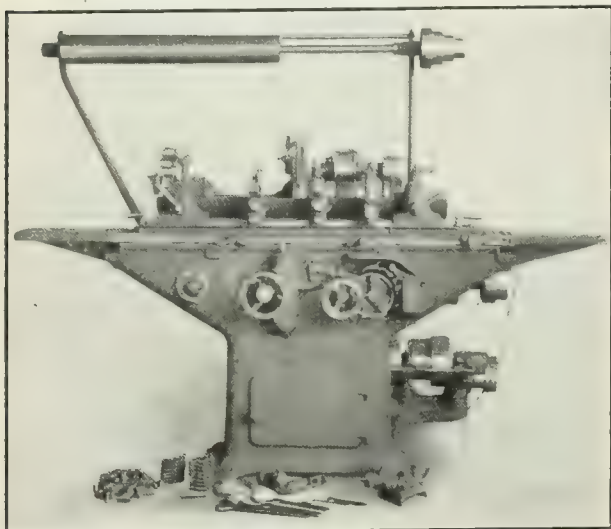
The Automatic Cylindrical Sizing Grinder Built by the Pratt & Whitney Company, Hartford, Conn.
